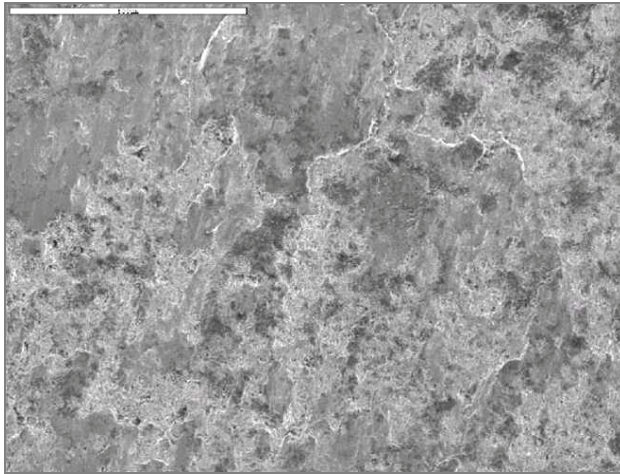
Sample B in Figure 10. The fatigue fracture part. SEM
